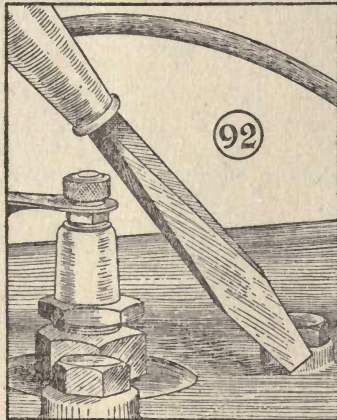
Spark plugs are tested with a screwdriver by shorting them to the cylinder block
